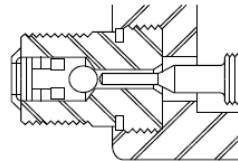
Pressure Releasing Tool as Installed (Ball Check Closed).
